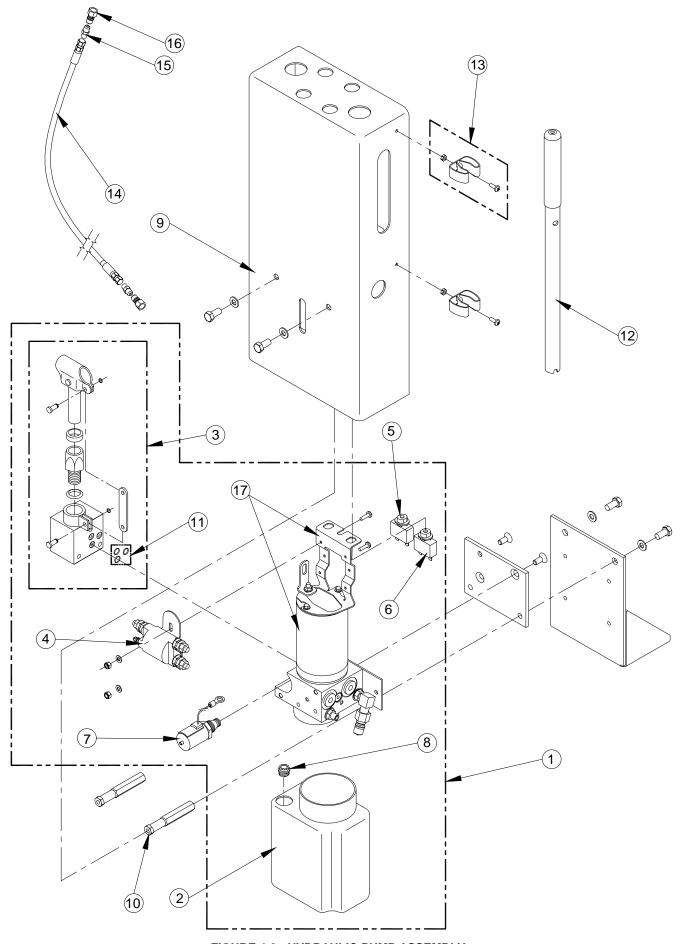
HYDRAULIC PUMP ASSEMBLY 32DPH06.E
